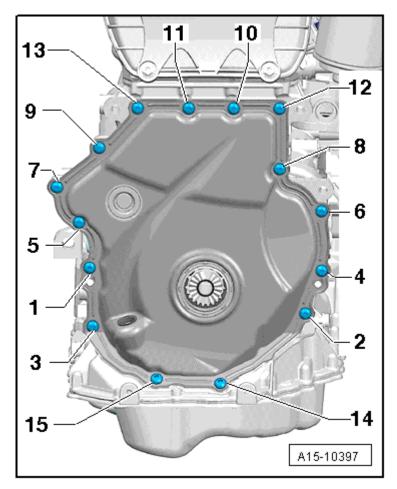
Identifying Timing Chain Lower Cover Tightening Sequence
